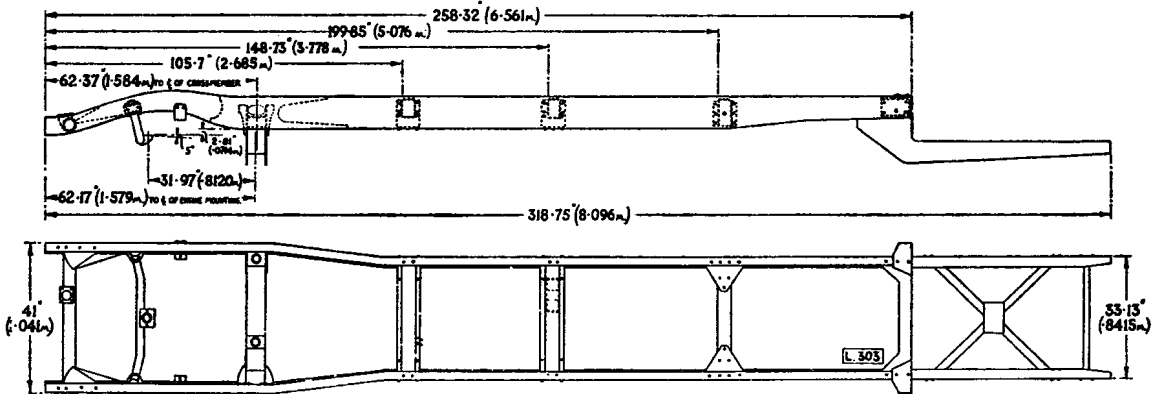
Chassis Frame—C.589 and CD.589 (See also Fig. 14)
